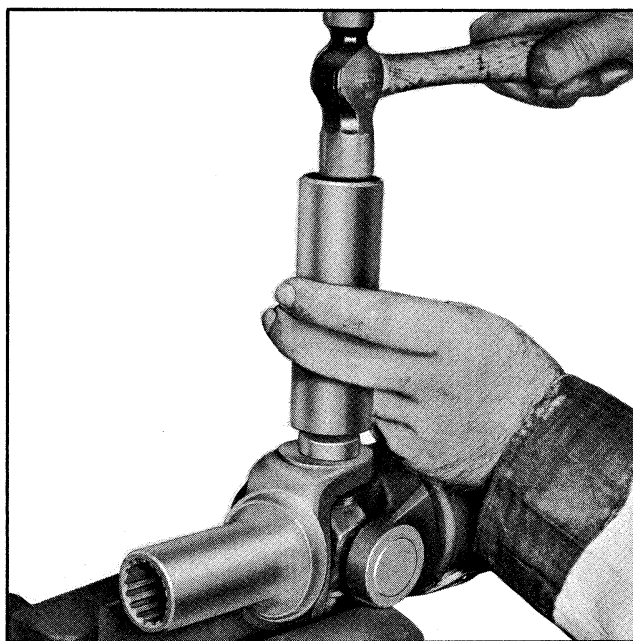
A-4 Removing Bearing From Splined Yoke Member
